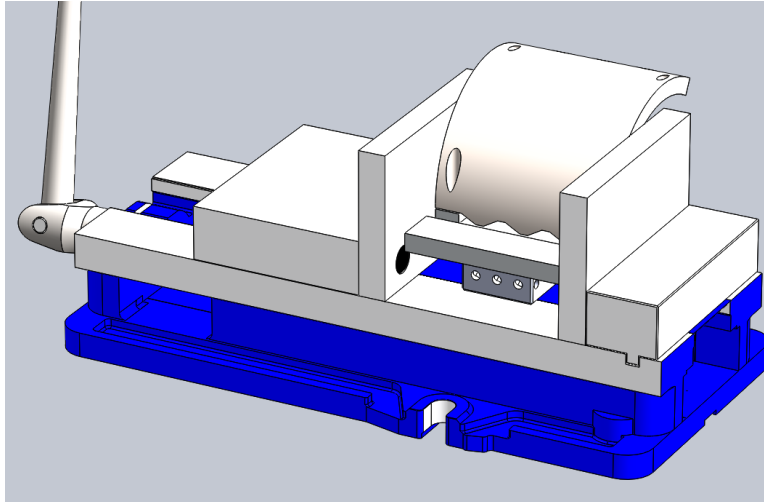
Printed part, alignment plate, and 1-2-3 block in a vise
